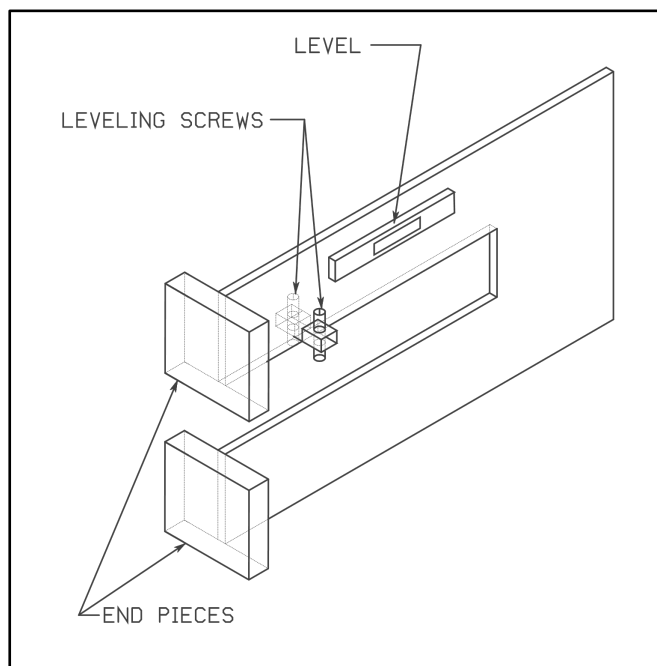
Sketch of the fixture for lateral alignment of uranium metal cylinders.
